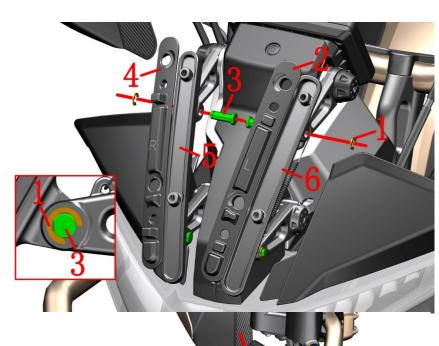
FRONT FORK COMPONENT		Windshield component 2	CHK	(0)
